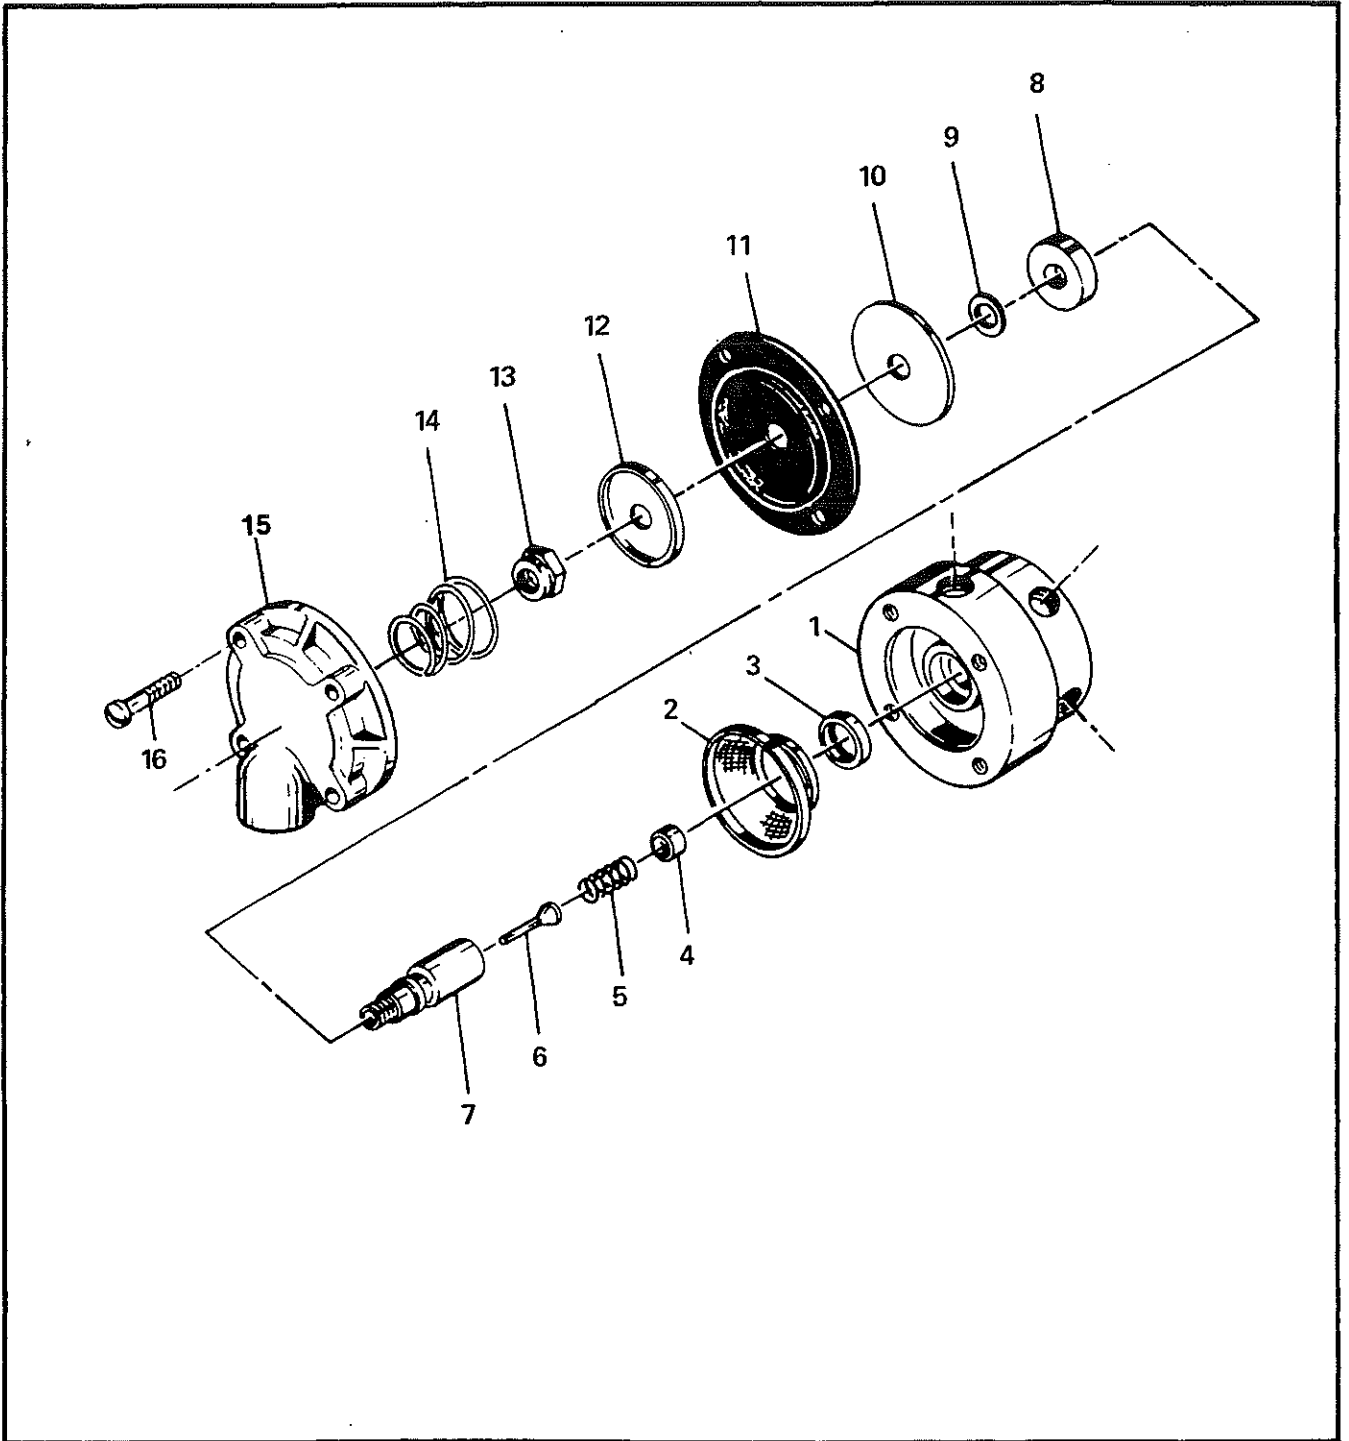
FUEL MANIFOLD VALVE ASSEMBLY.
